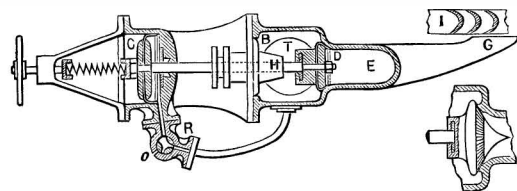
THEORETICAL LONGITUDINAL SECTION OF A PROPELLING APPARATUS.
